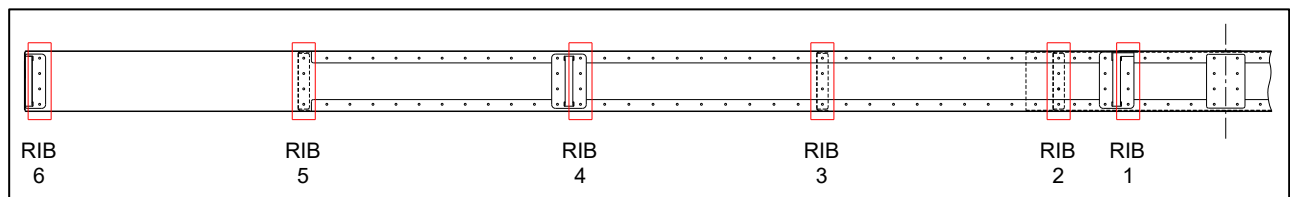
Spar Rivets to be Removed (Left side of stabilizer shown only)
